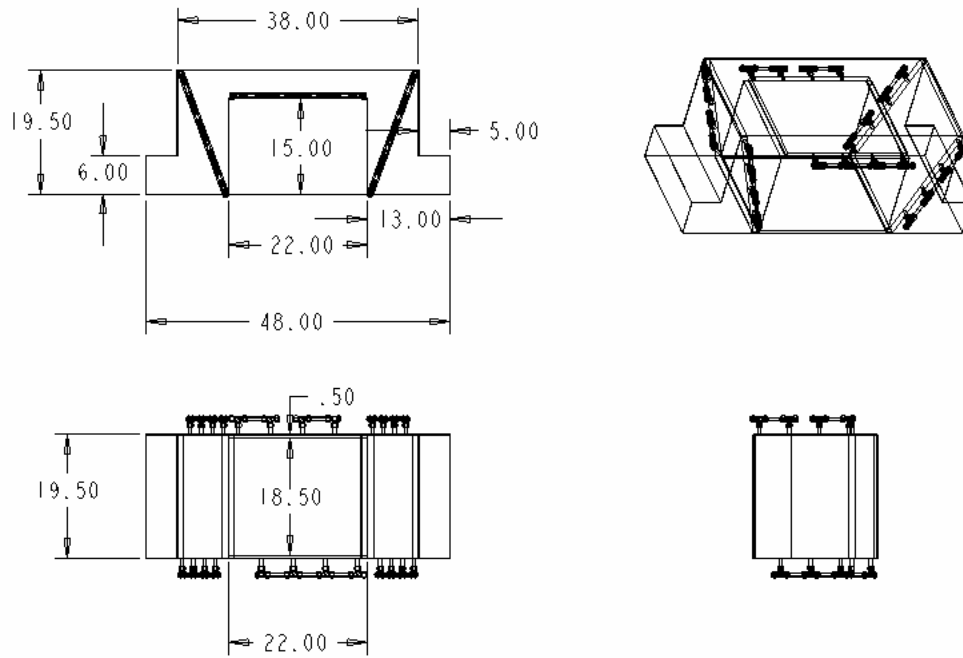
Drawing of the gas cooler of the CO₂ based bread board ECU
